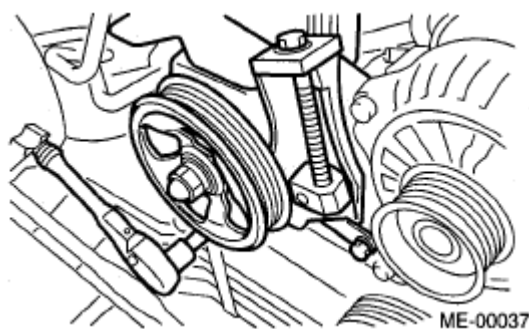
Identifying Power Steering Pump Bracket Bolts
